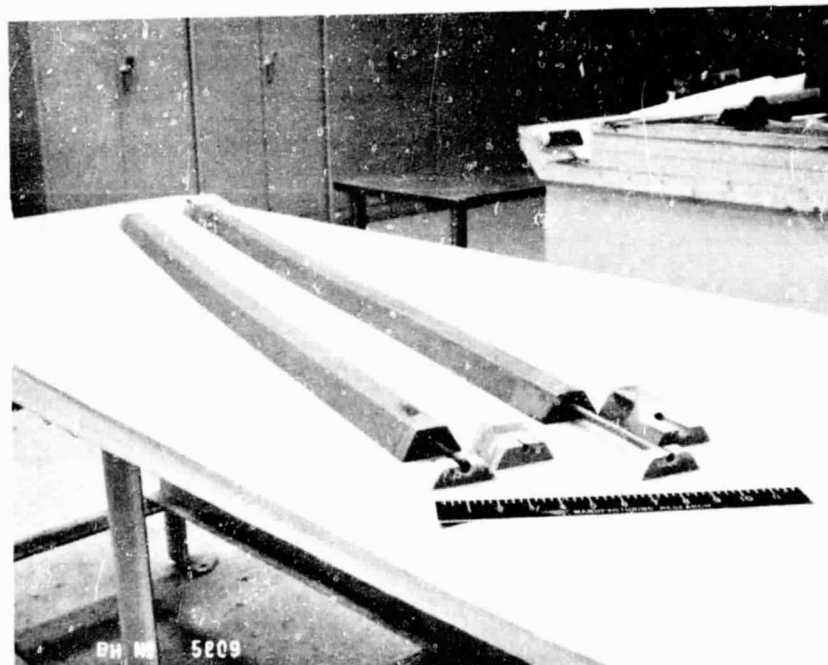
Formed Rubber Mandrels. Bladder on left is pressurized through a short length of tubing. Bladder on right has a full length perforated tube
